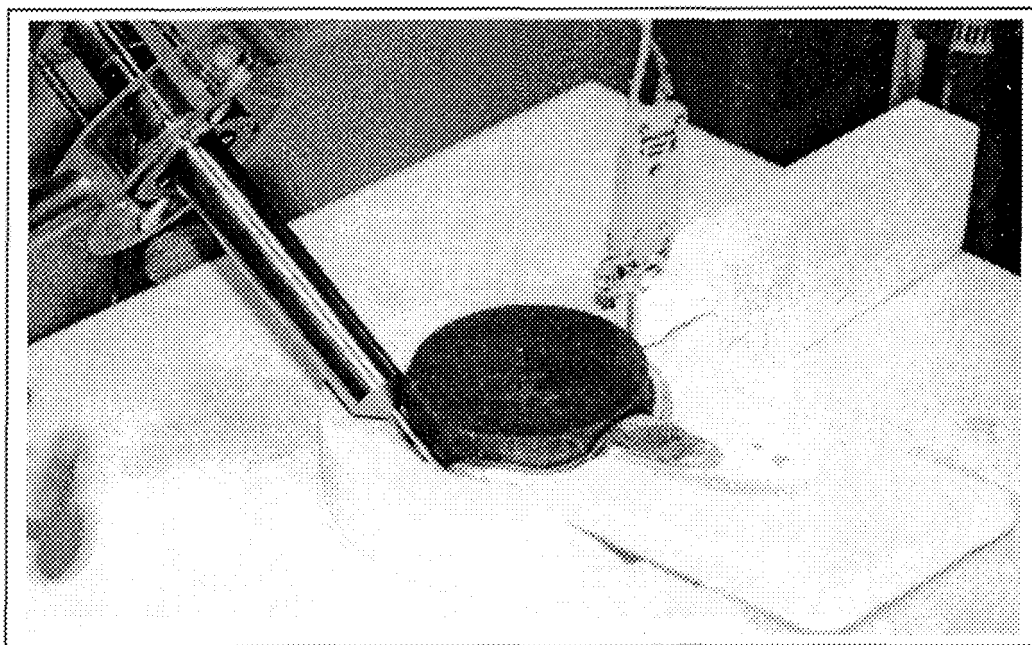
b) The photograph shows the location of AE probe and thermocouple in the casting.
